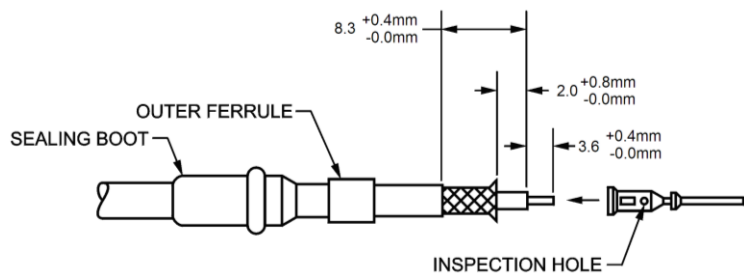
Stripping Dimensions, Sealing Boot, Ferrule and Contact Before Crimping the Contact
